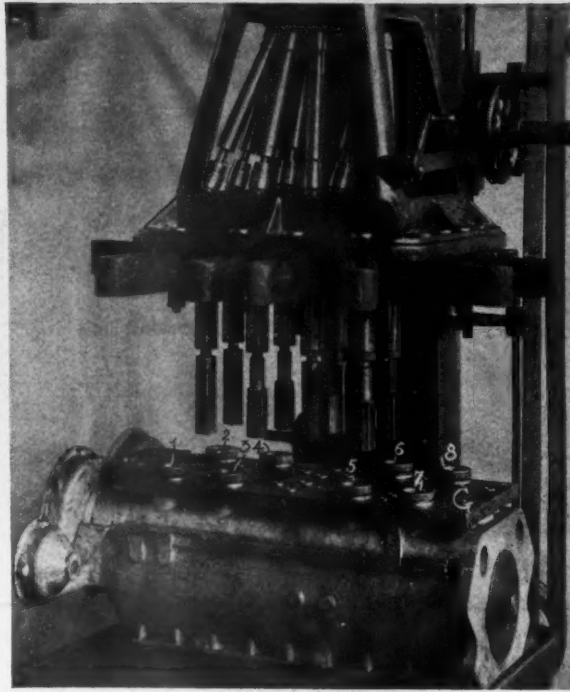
MULTIPLE-SPINDLE DRILL ON A CRANKCASE
